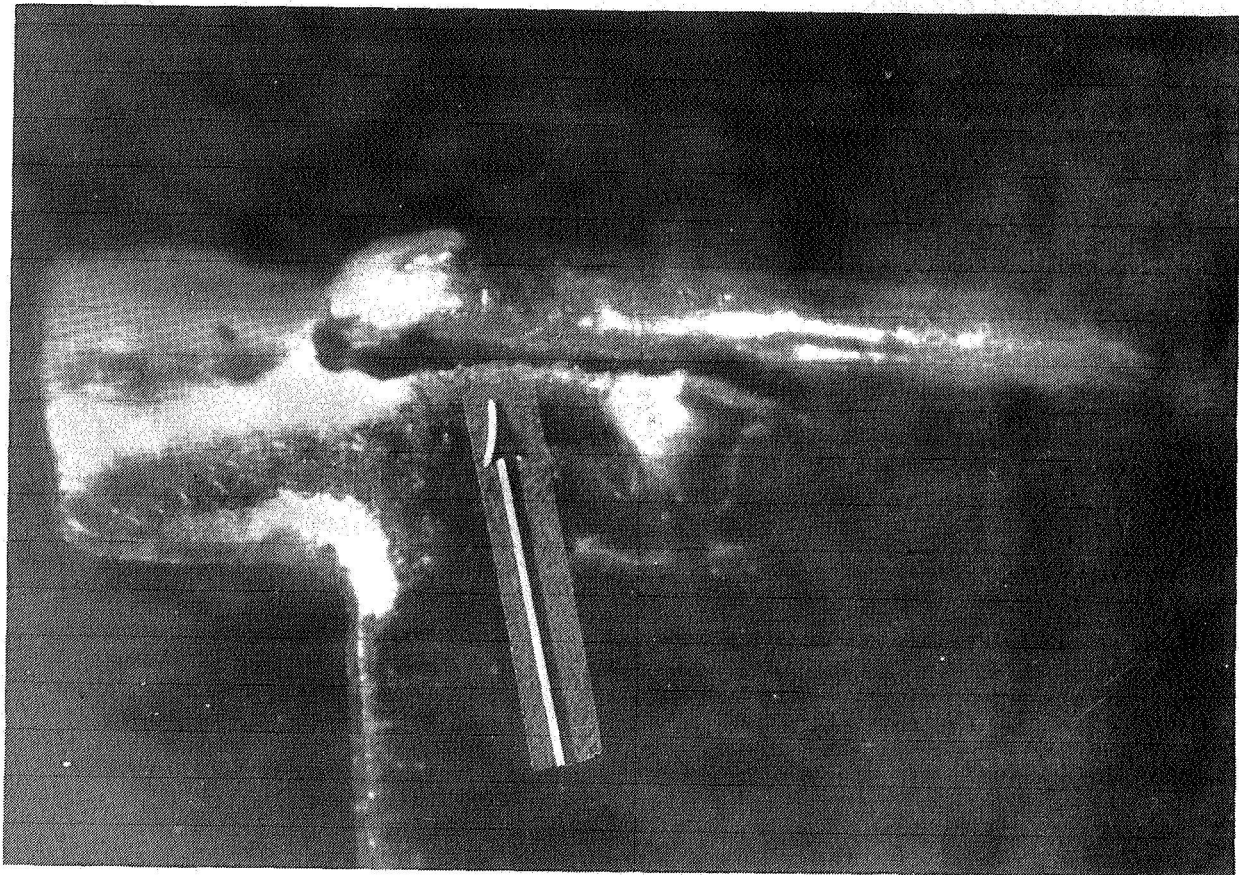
CRACKED SOLDER CONNECTION AFTER
